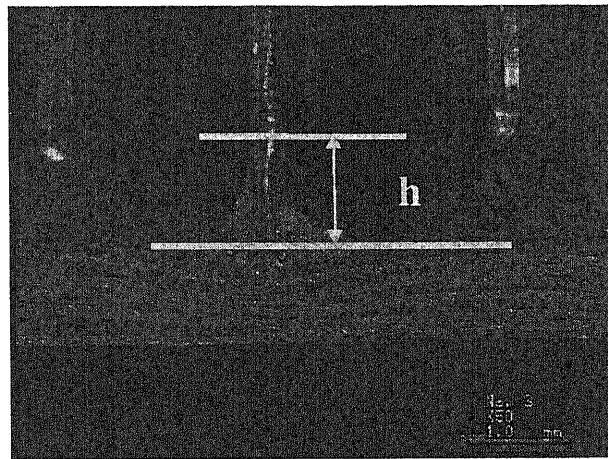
Cross sectional view of honeycomb core sandwich panel
